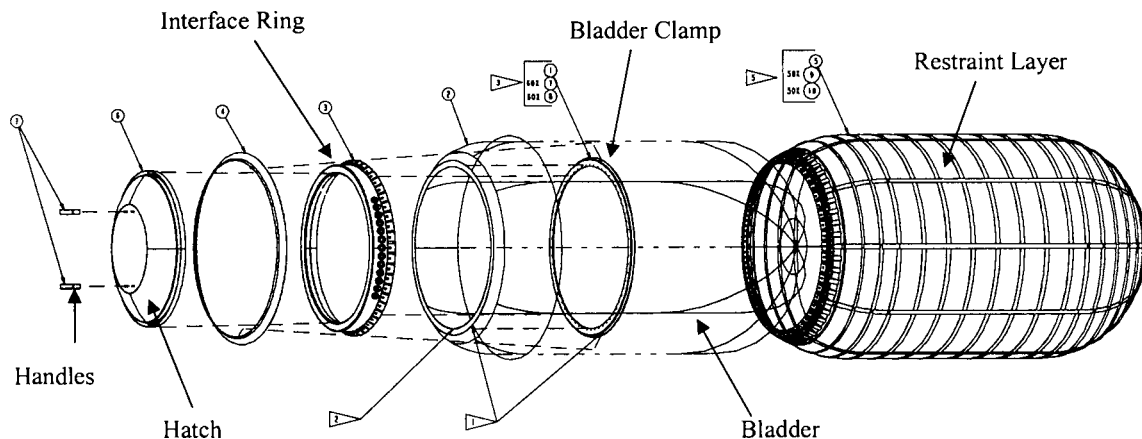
Portable hyperbaric chamber structure (shown in an exploded view).
